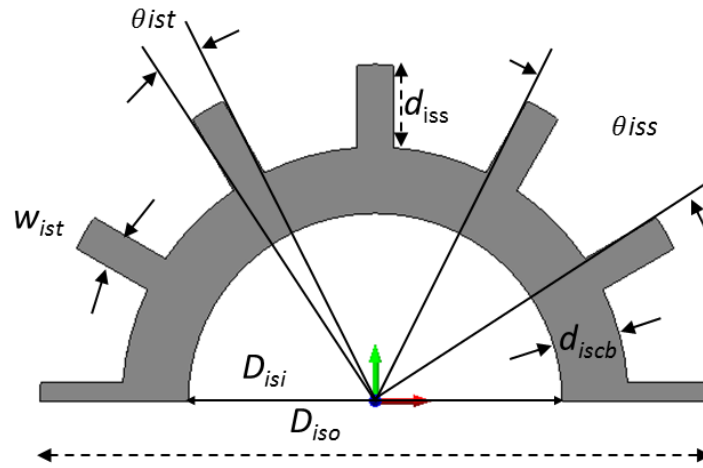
Inner Stator Dimensions of The New Split Teeth PM Machine.
